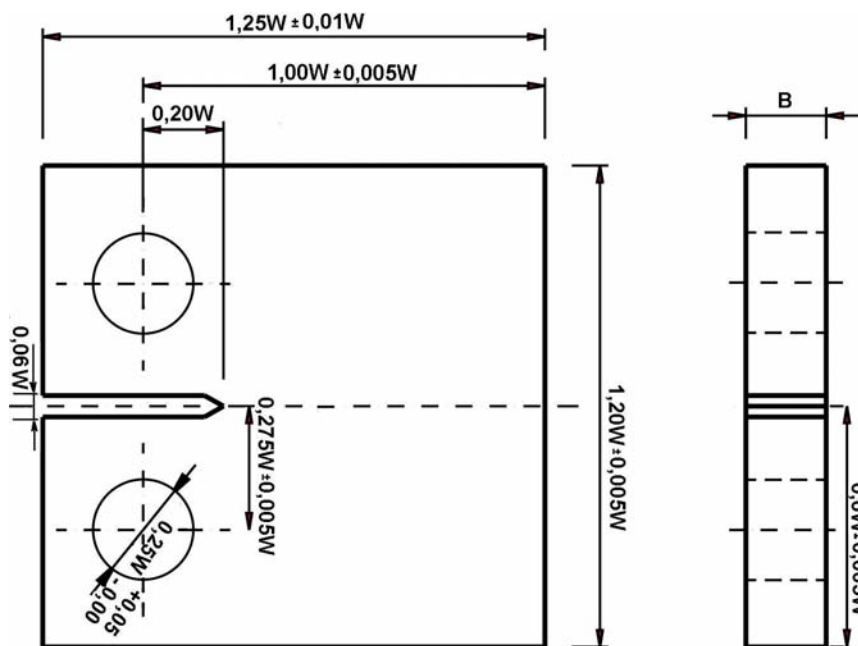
Dimensions of the specimens type compact tension, C(T), for fatigue crack propagation, according to the standard ASTM E 647-00 (2000).
